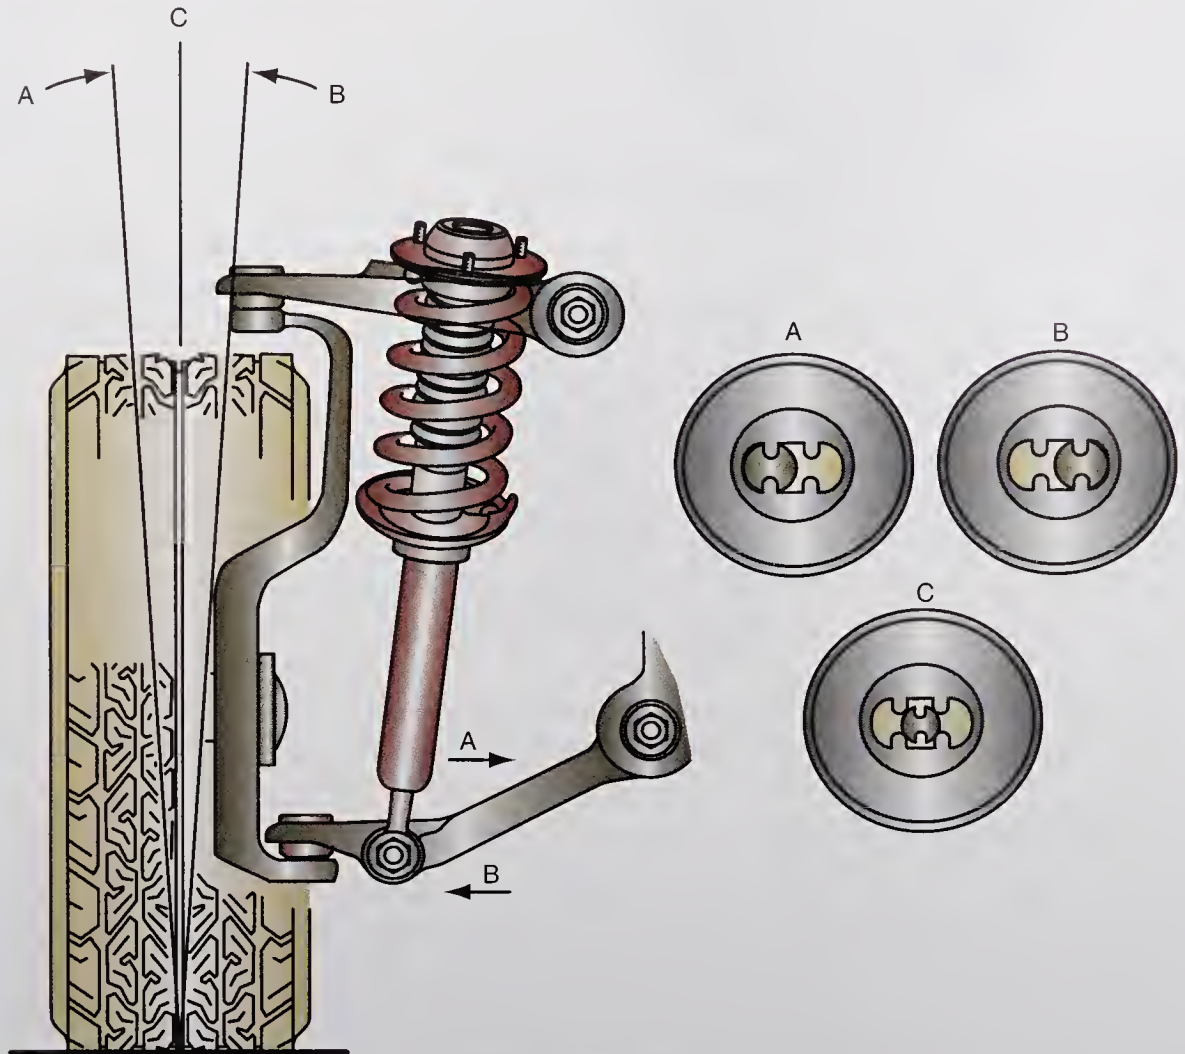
Adjustment bolt positions in tension strut or lower control arm bushing to provide camber adjustment.
